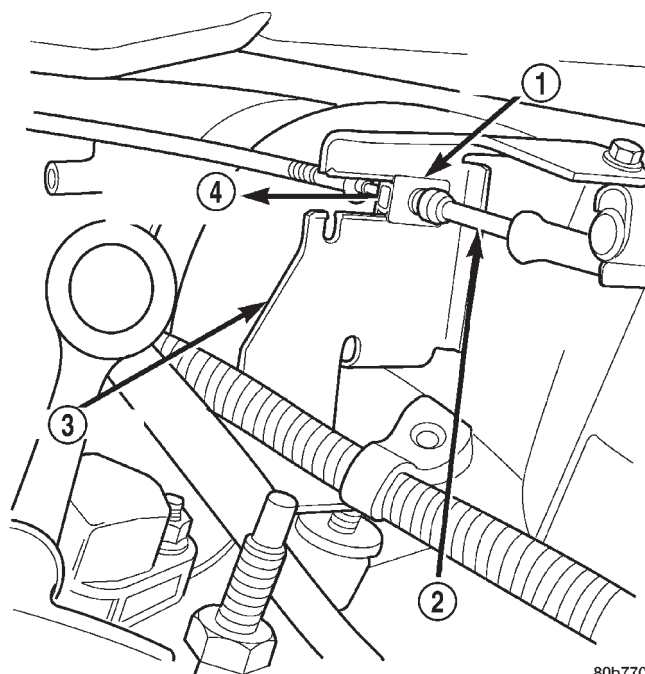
Speed Control Cable at Bracket—4.7L V-8 Engine
